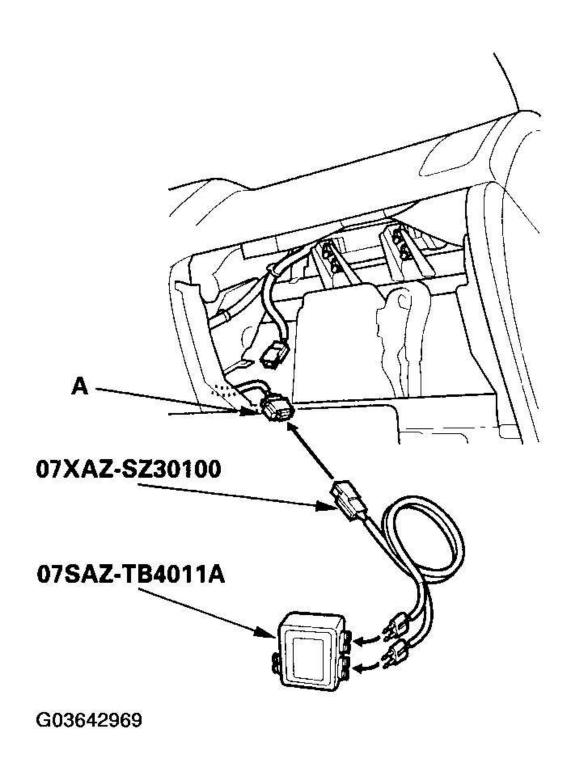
Disconnecting Front Passenger's Airbag 4P Connector From SRS Main Harness Courtesy of AMERICAN HONDA MOTOR CO., INC.
